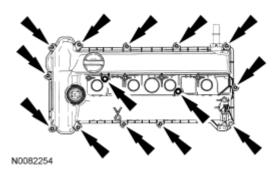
Locating Retainers On Valve Cover Courtesy of FORD MOTOR CO.
